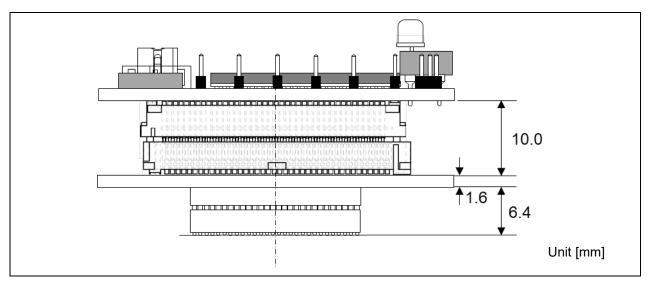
Drawing of the Assembly for the RTE77025x0CBG468T000J (468 Pins)
